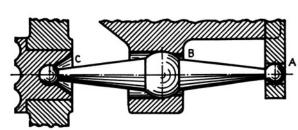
Three ball joints used in a gear-shift mechanism. Hole A is in shifting rod; B is the pivoting center, which is retained by the inserted locating plug at C.
